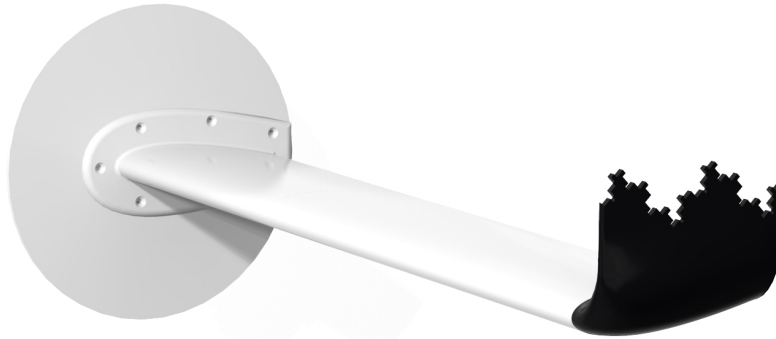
Rendered illustration of the wing and fractal endplate assembly.
